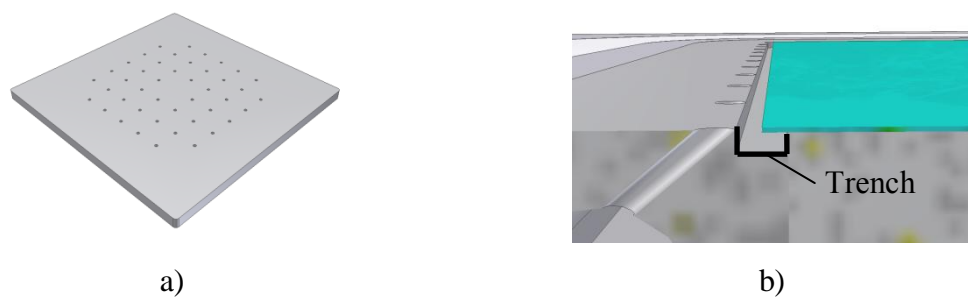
Illustration of the wafer-base element: a) Perspective view showing the through-holes pattern; b) Section view where it shows part of a $156 \times 156 \text{ mm}^2$ wafer (green) with an edge overlap of 1 mm to get an accurate camera positioning detection.
